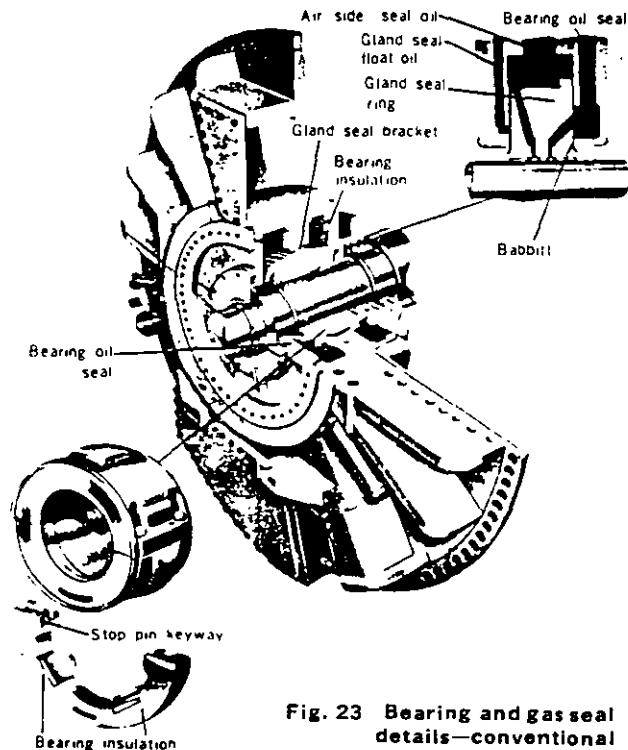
Bearing and gas seal details—conventional hydrogen cooled
